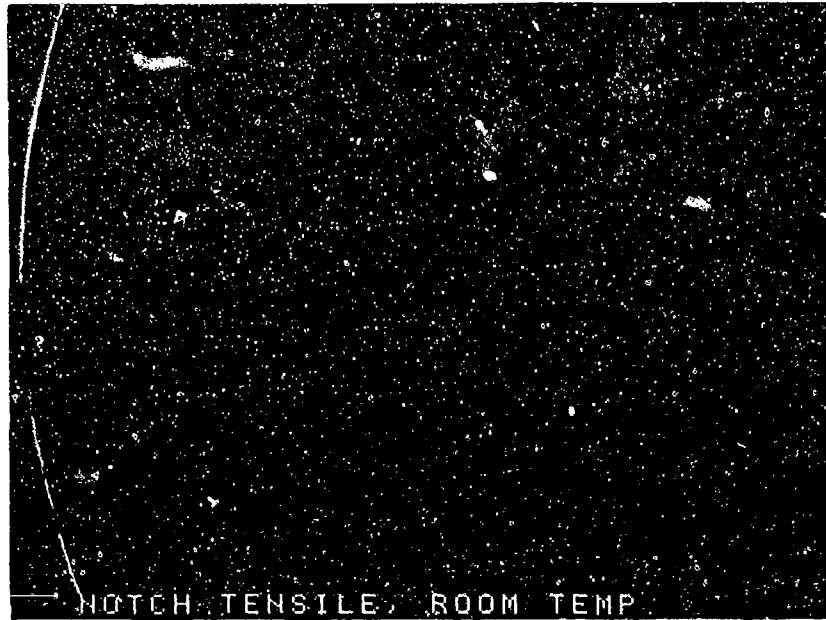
Low magnification photograph showing relatively flat fracture through a thread root.
